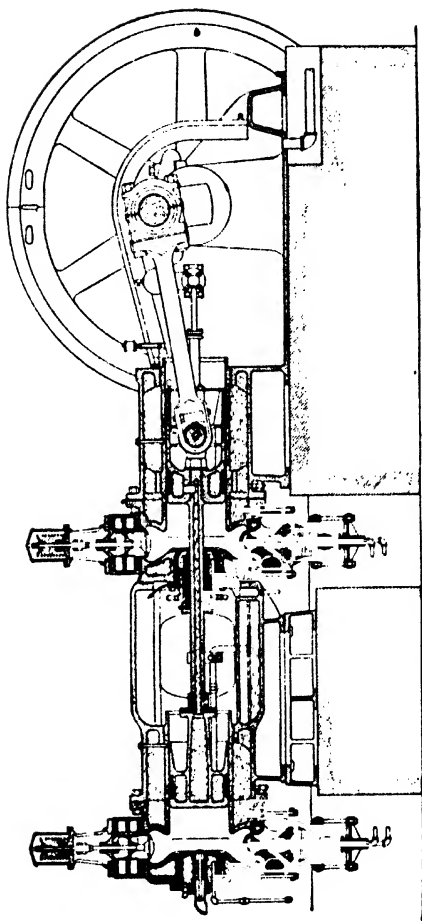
Longitudinal Section of Warren Heavy-Duty Tandem Gas Engine
